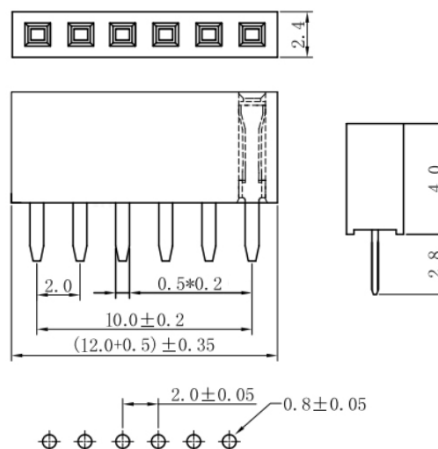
Mechanical Dimensions of ATDSC2MM6P
